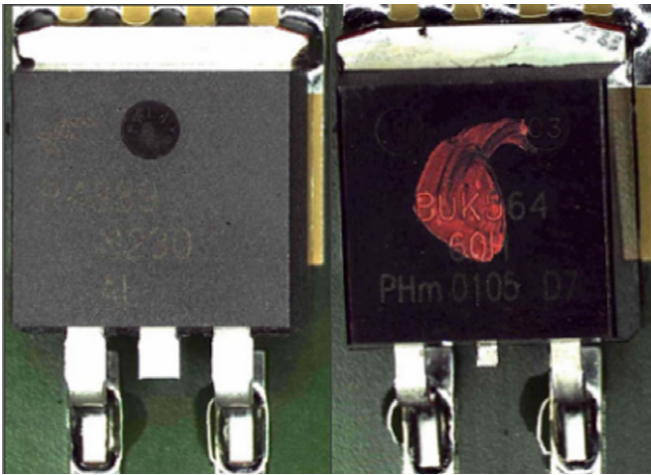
Left: TO263 package (dimensions: $10 \times 9 \times 6 \text{ mm}^3$); Right: Displaced TO263.
